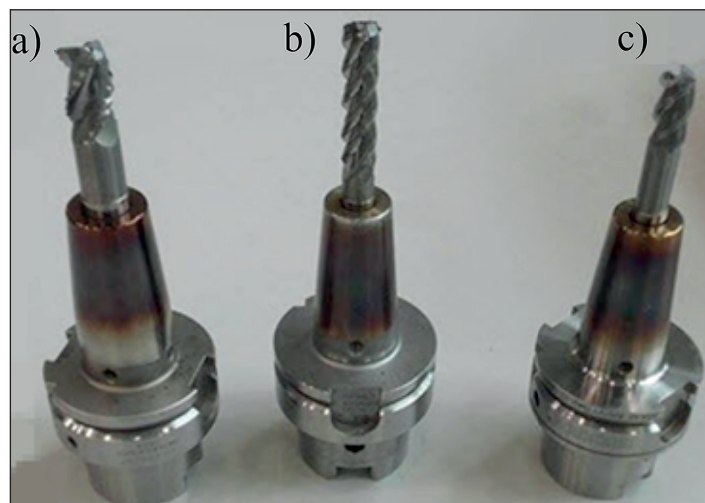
Cutting tools used during tests: a) SGS Tools 44303, b) SGS Tools 44631, c) SEGER AL103-120
